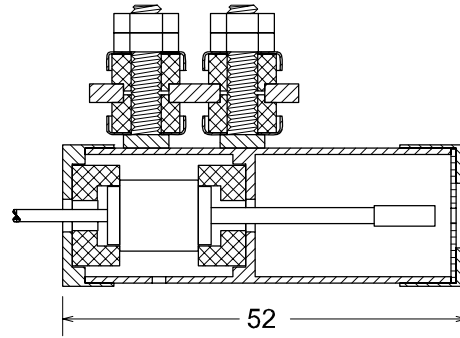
Cross section of hollow-cathode assembly with reduced-mass body.
